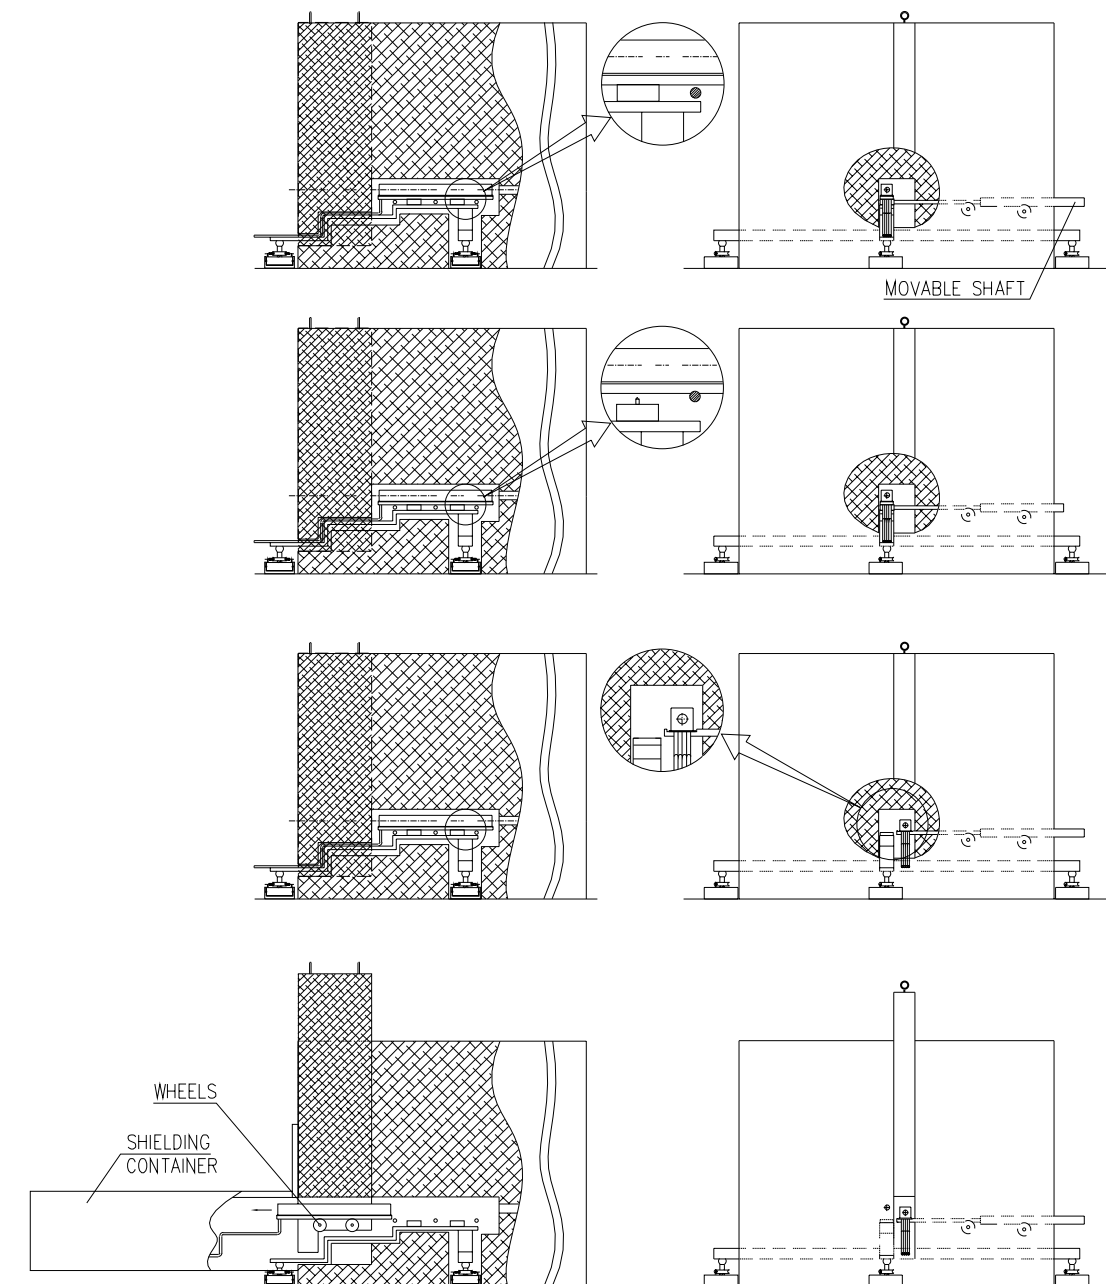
The sequential stages of the removal of the target unit with lower placed mechanisms.
